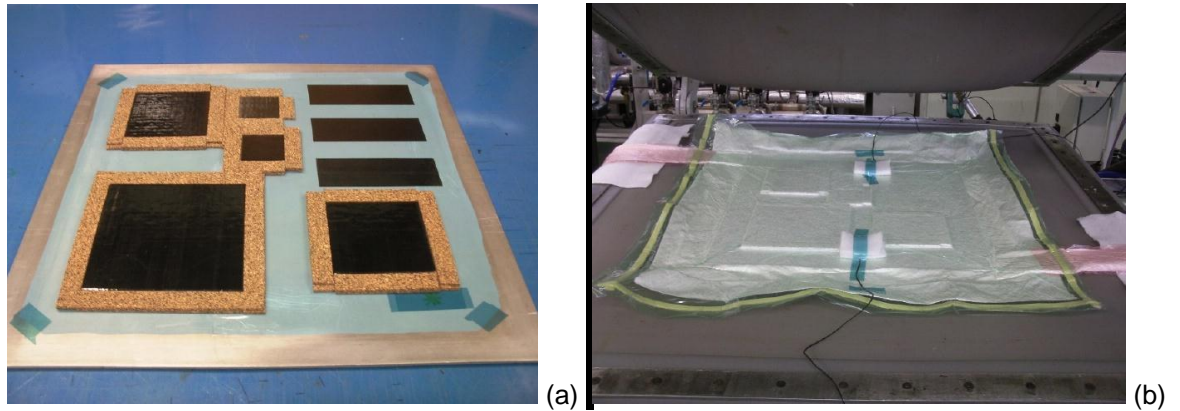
(a) Final sample lay-up with cork edging and (b) vacuum packed samples in the Quickstep system ready for curing.
